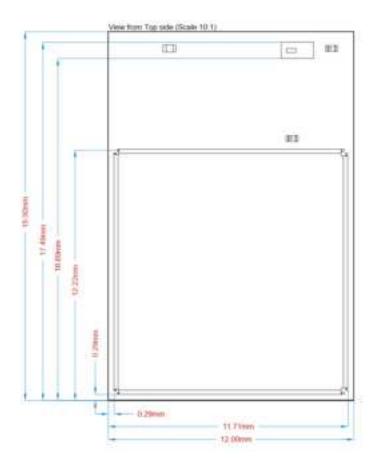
PCB Footprint (Top View) - NX611 M.2 1218 Module
